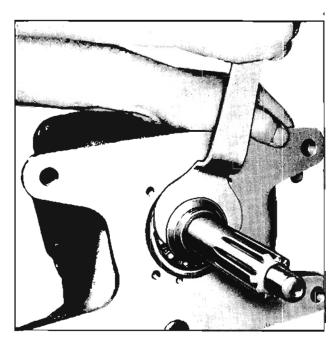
Removing Main Drive Gear Retaining Nut thrust washer may now be removed.
